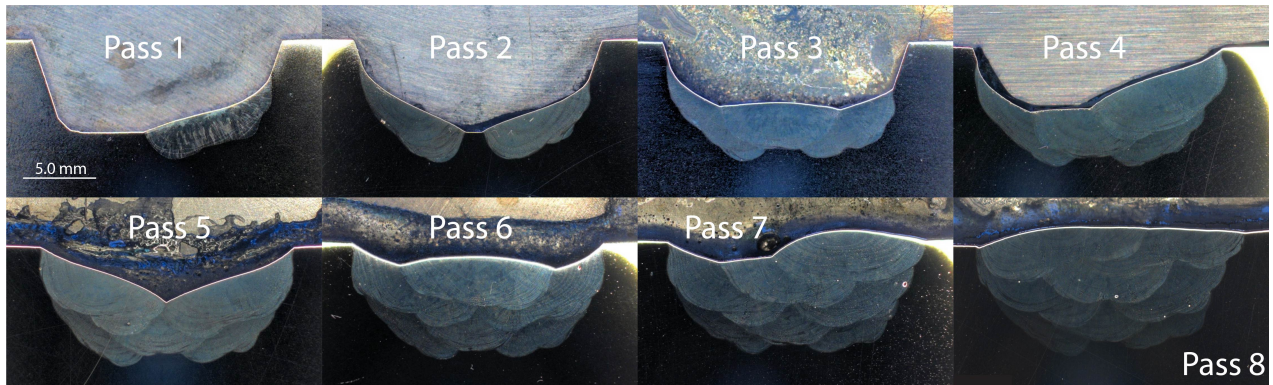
Evolution of weld bead geometry in the staggered weld
